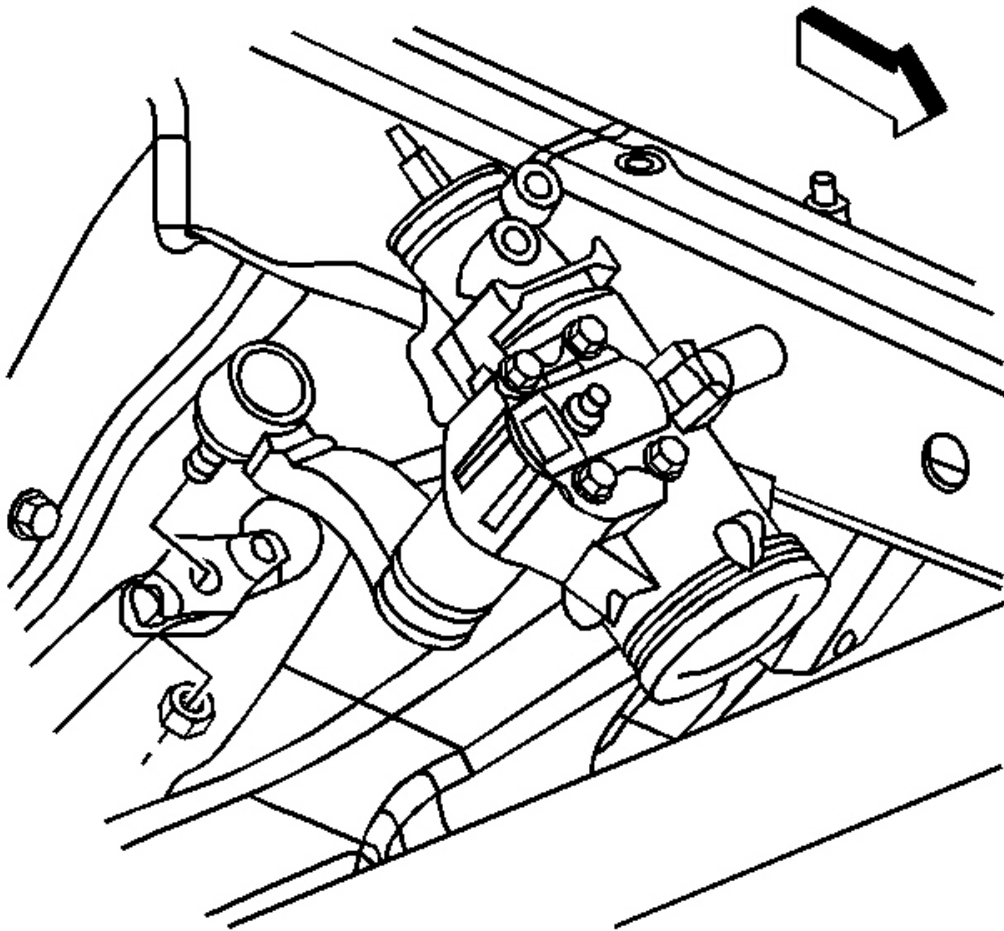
Removing The Bolts Retaining The Steering Gear To The Frame (Non Rack and Pinion)
